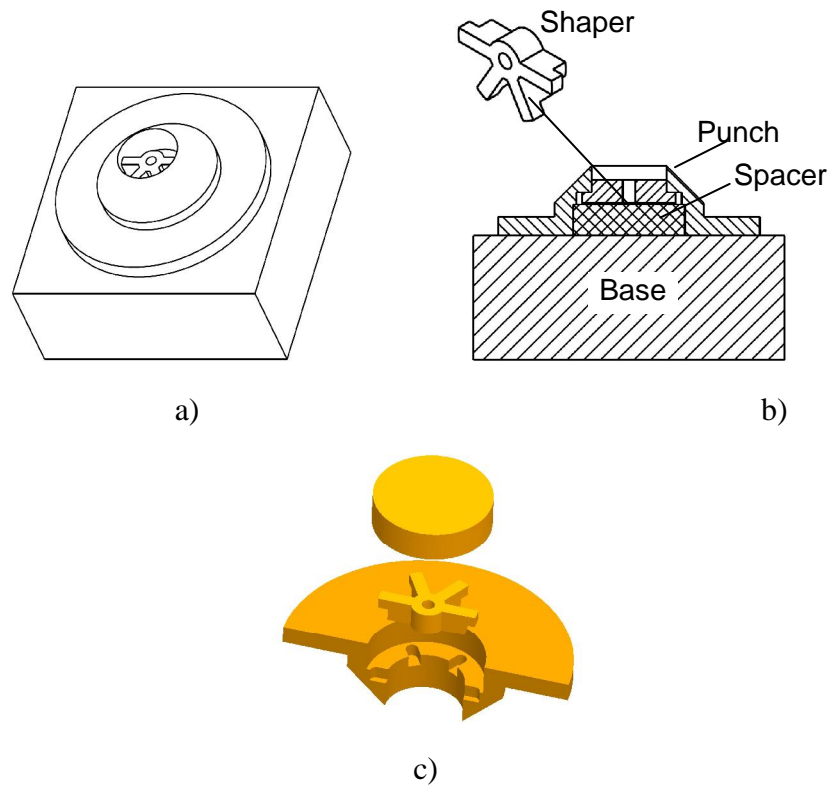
Design of the embossing tool for waveguide fabrication: a) assembled view, b) cross-sectional view, and c) exploded view.
